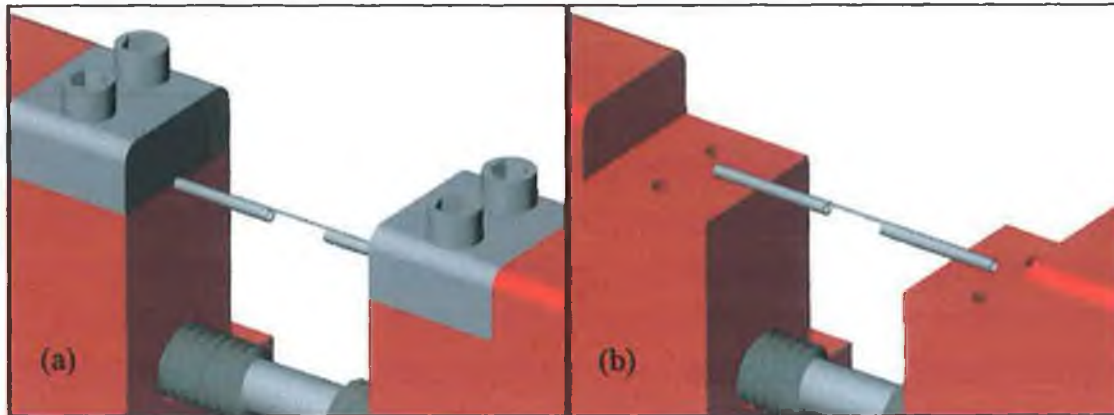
The apparatus is designed to (a) clamp the specimens or just (b) support them.
